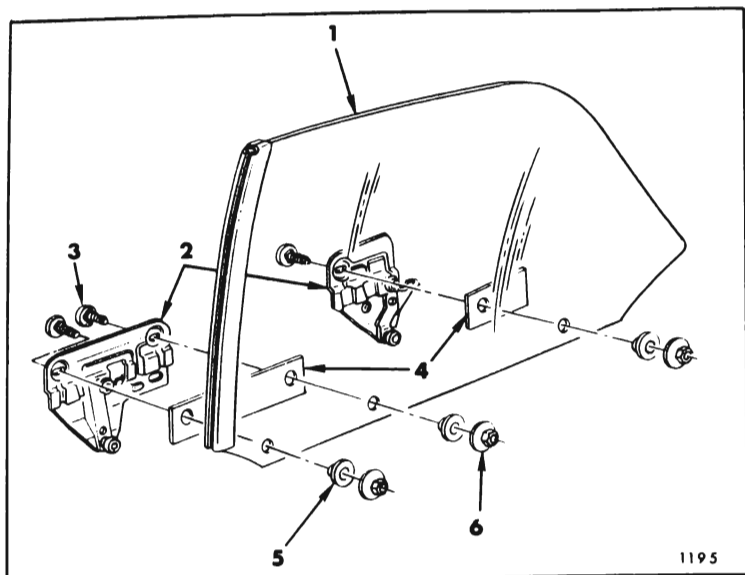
Rear Door Window Assembly - "Z-39" Style
